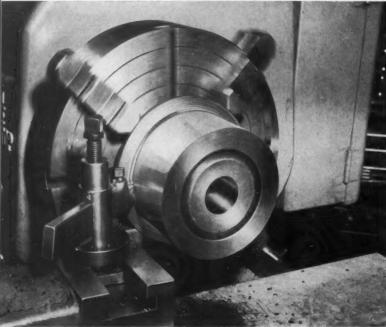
(Left) Turning operation on high-carbon, high-chromium steel roll which is used to form seamed tubing
